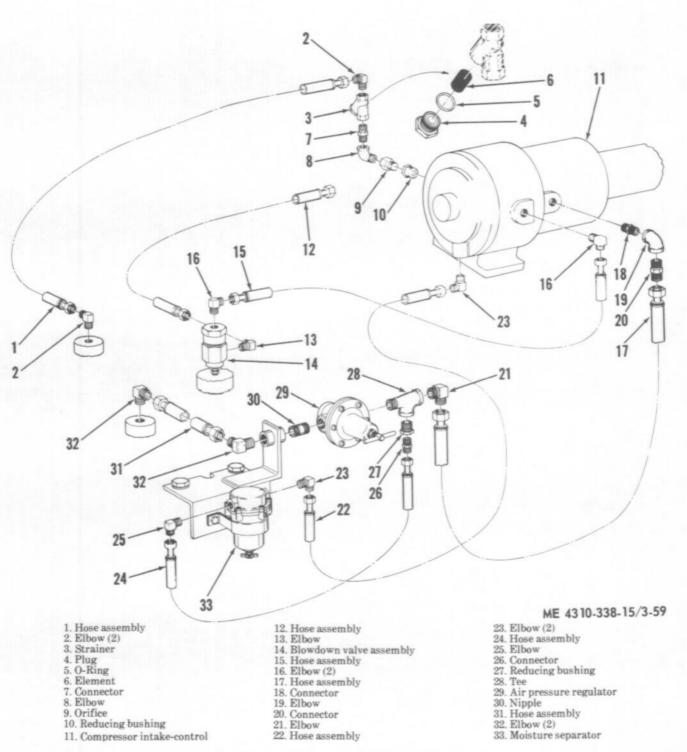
Air hoses, strainer, and fittings; removal and installation.
